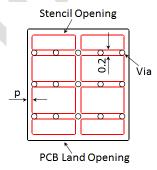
Stencil Openings Shall not Cover Via Areas If Possible (Dimensions are in mm)
